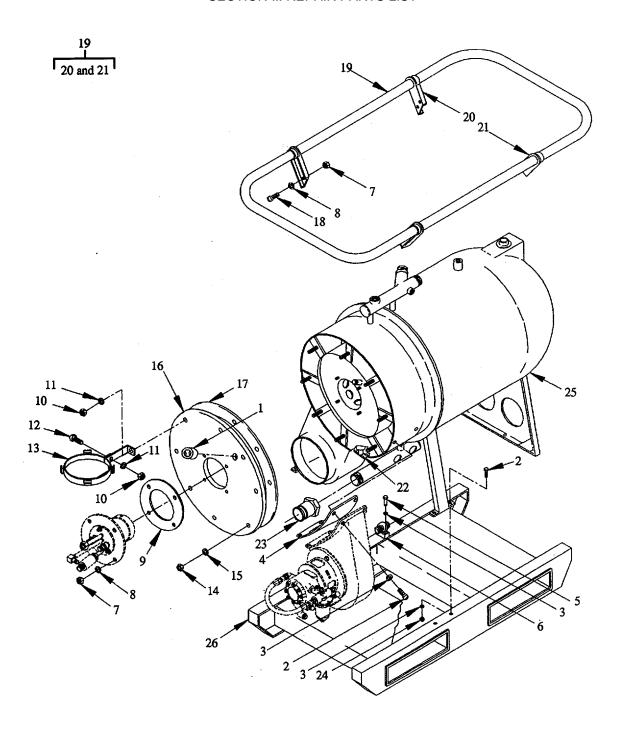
WATER VESSEL-SKID AND HANDLE ASSEMBLY
